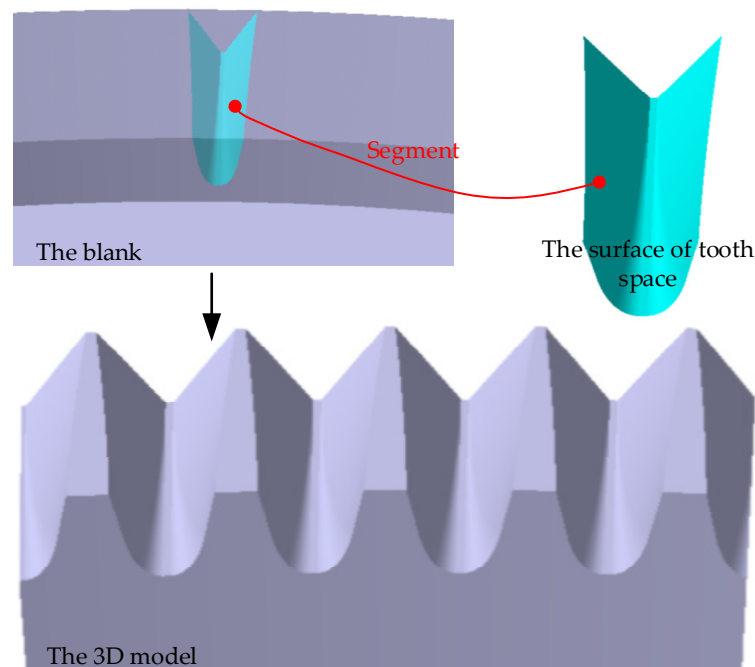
A 3D model of real five-pairs-of-teeth face gear.
